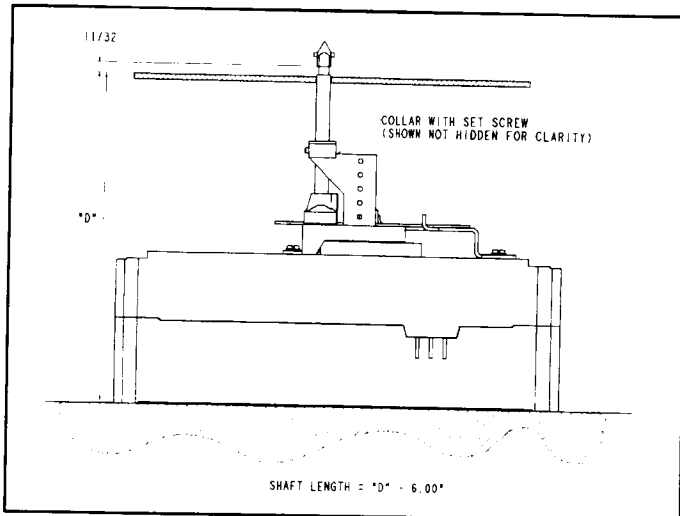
Cutting Shaft to Length and Collar to Shaft
